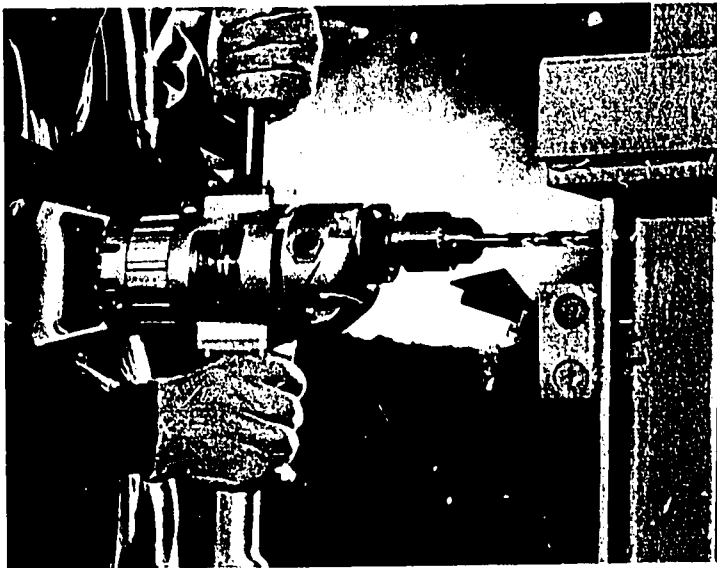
This twist drill was conditioned so that it would be hard enough to drill holes through other materials.
